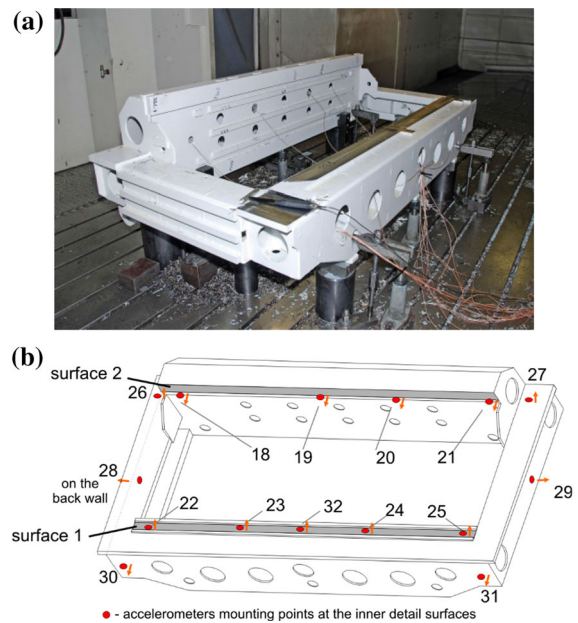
Test workpiece: a clamped on the machine table, b simplified scheme of the workpiece with indicated mounting points for accelerometers
